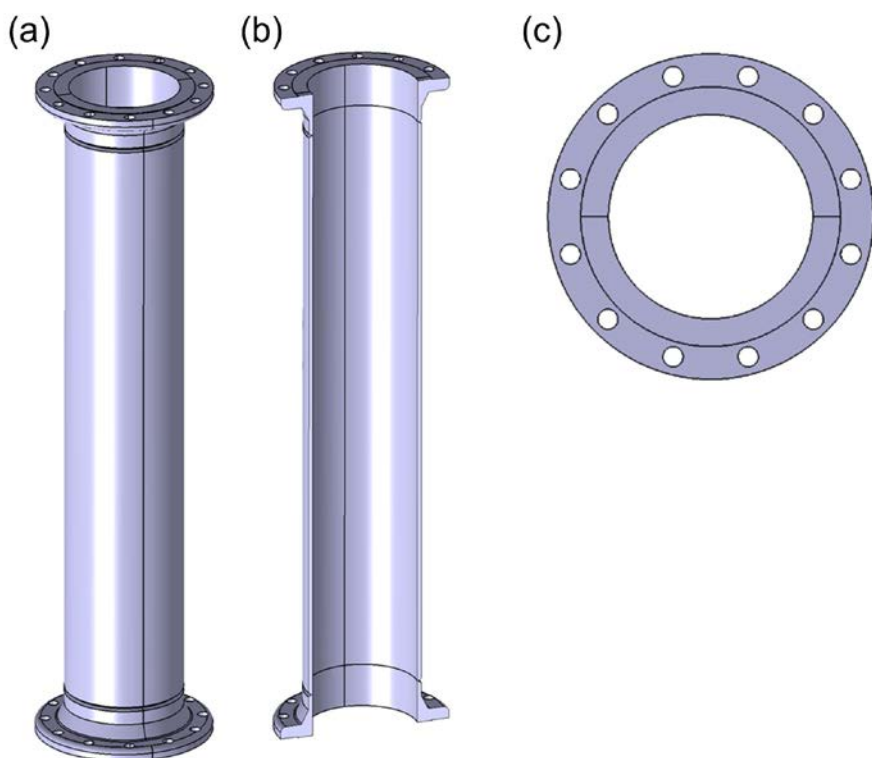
Three-dimensional model of PILLAR upper vessel in several viewpoints. (a) Isomeric view, (b) cross-sectional view in axial direction, and (c) top (bottom) view
